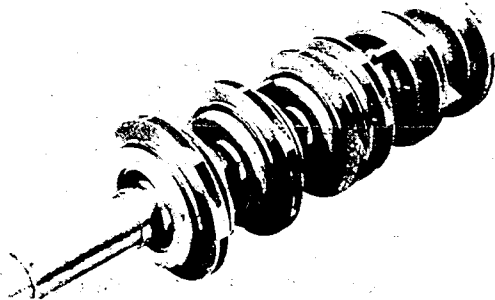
Rotor of six-stage opposed-impeller axially split casing pump. Stage-pieces are assembled on the shaft between the impellers.
